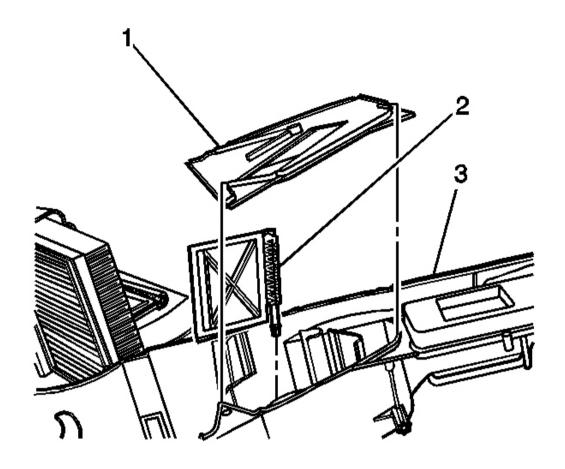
Left Temperature Door & Lower HVAC Module Case Courtesy of GENERAL MOTORS CORP.
